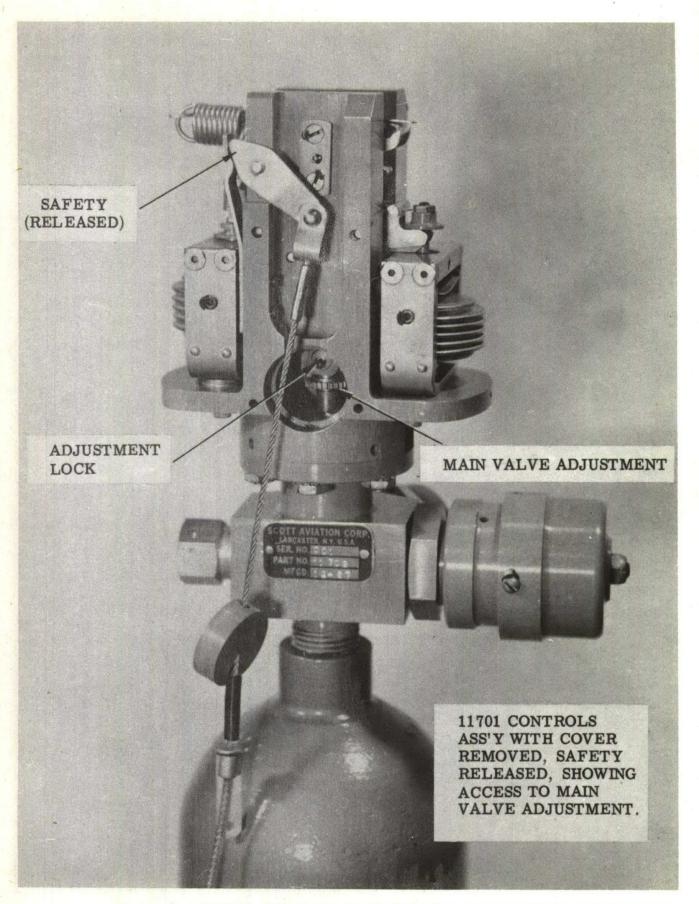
CONTROL ASSEMBLY, COVER REMOVED, SHOWING VALVE ADJUSTMENTS
